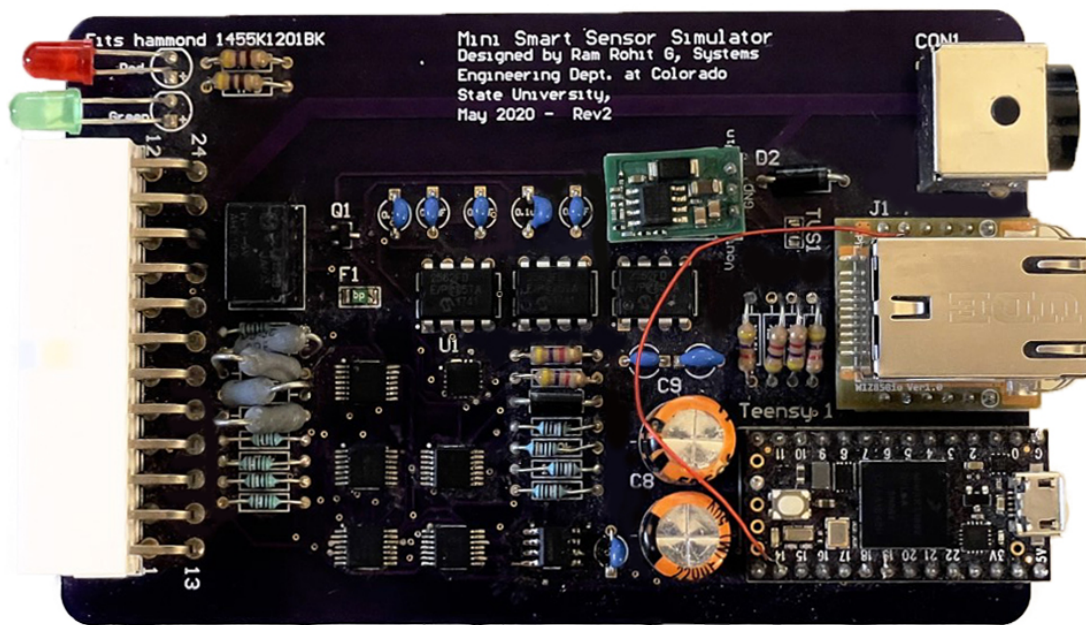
Assembled Mini-SSS3 circuit card assembly
